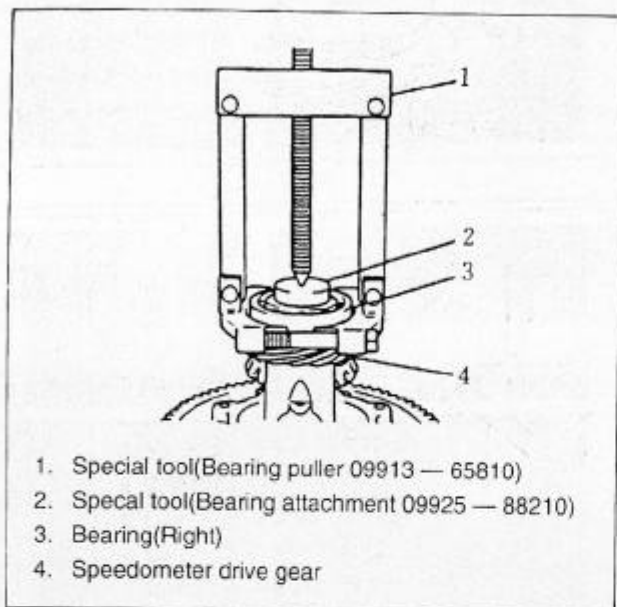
C — 2 REMOVING DIFFERENTIAL SIDE BEARING
